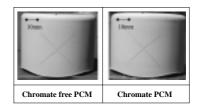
Appearance of deep-drawn pre-coated sheets after 2-year outdoor exposure test in Okinawa
